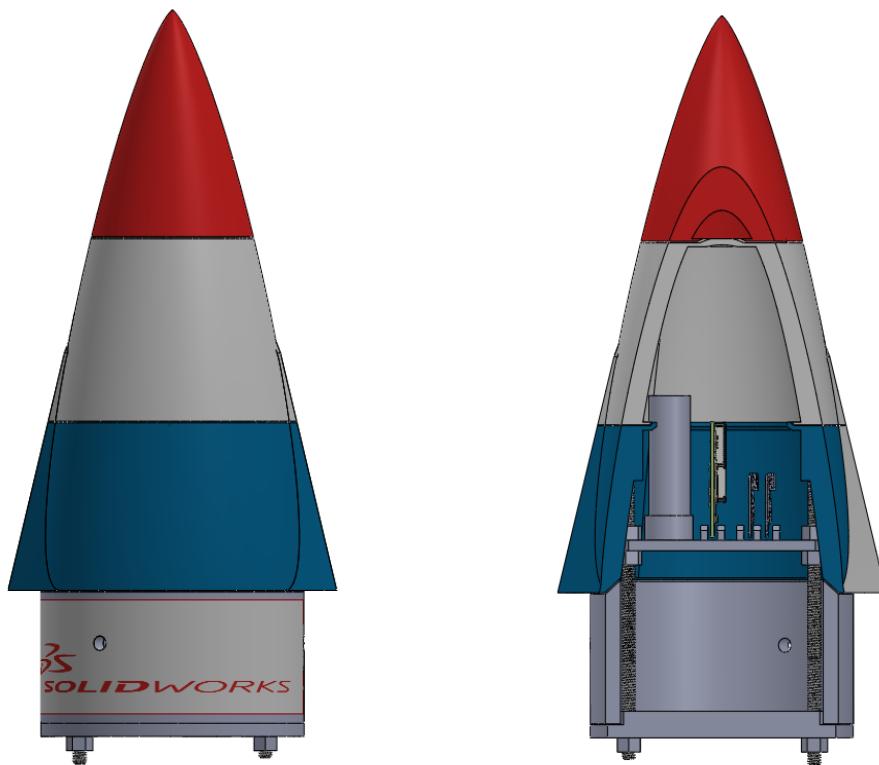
Nose Cone Assembly CAD Model with Cross Section View
